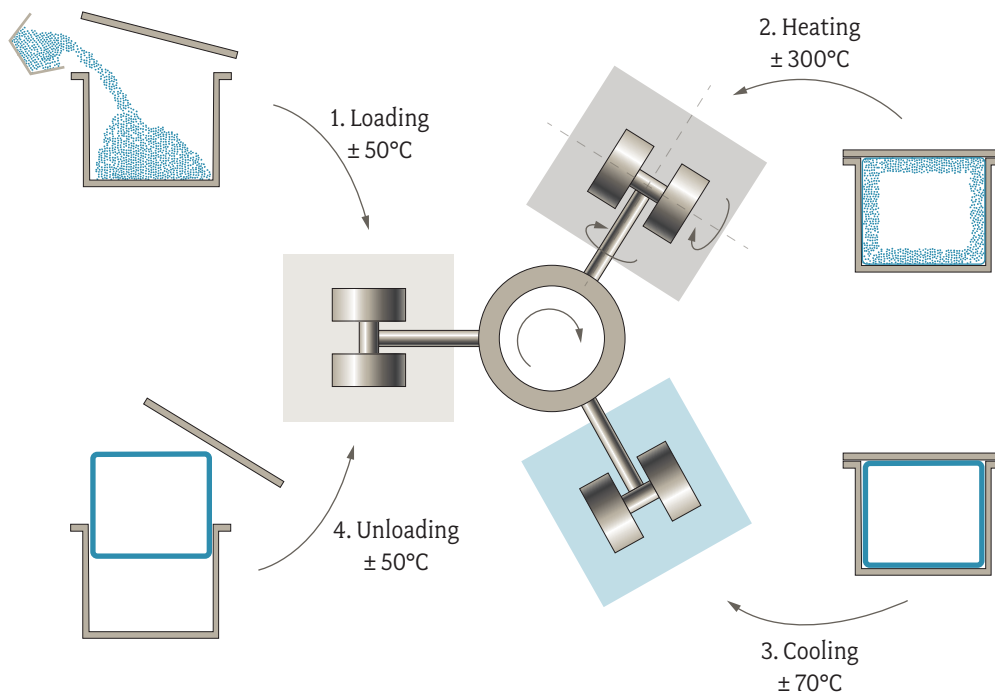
A schematic overview of the working principle of rotational moulding (after pentasmoulding.com,n.d)
